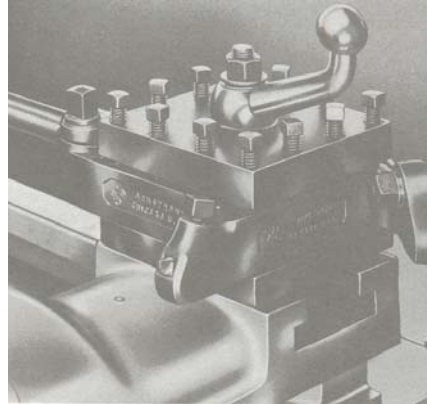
A turret type tool post permits the use of up to 4 different cutting tools
